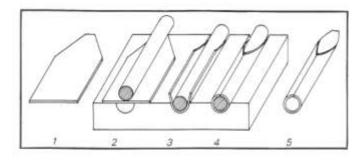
shows how tube is made today. (Untracht 1982; 262)
